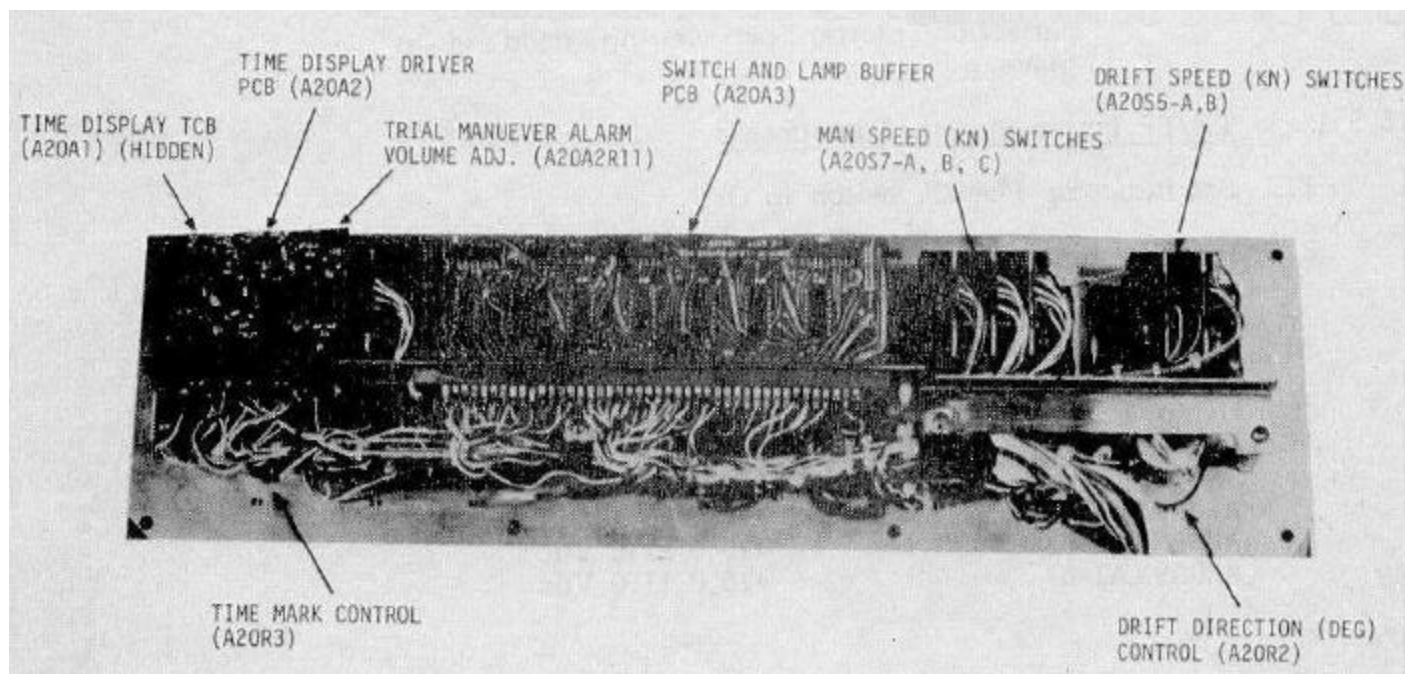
TM/EP Headset Control Panel Parts Location (Rear View)
